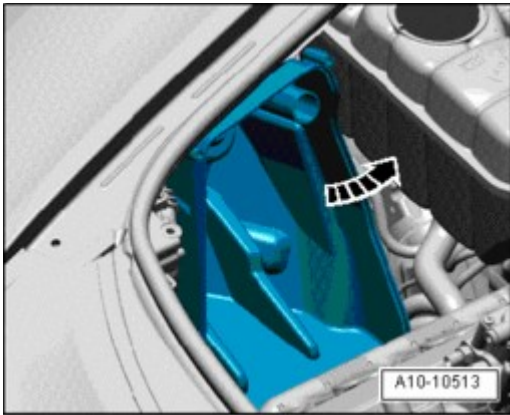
Tilting Upper Part Of Air Filter Housing Up/Out
